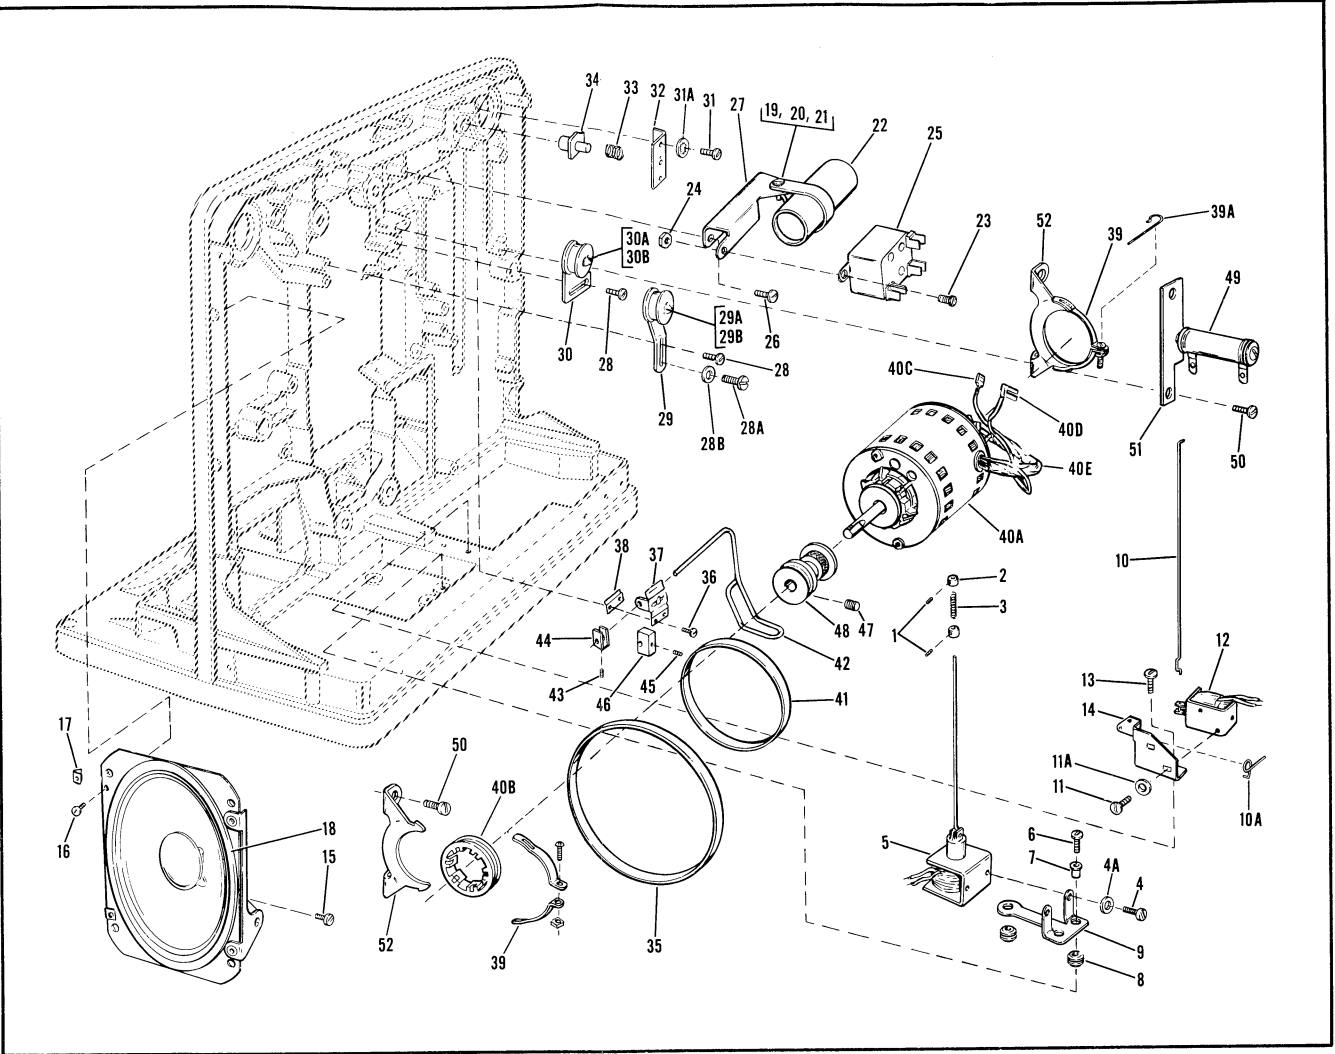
Filmosound Projector Main Plate Exploded (Sheet 3)
